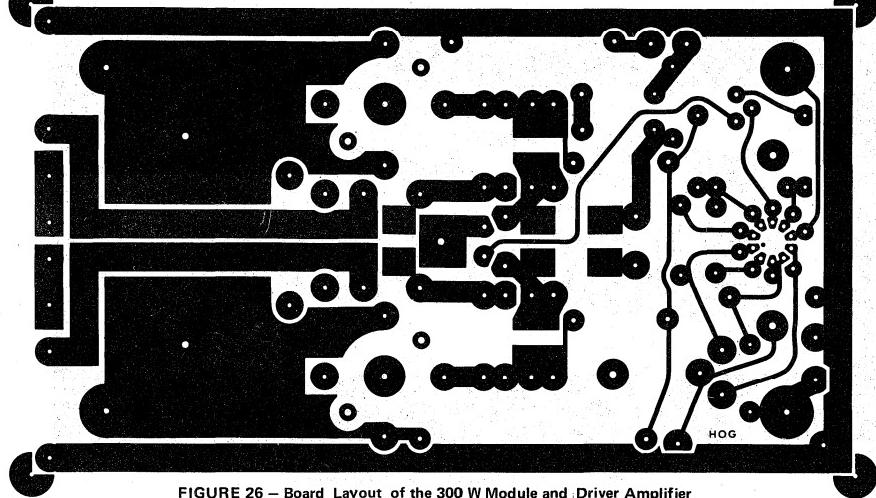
Board Layout of the 300 W Module and Driver Amplifier
